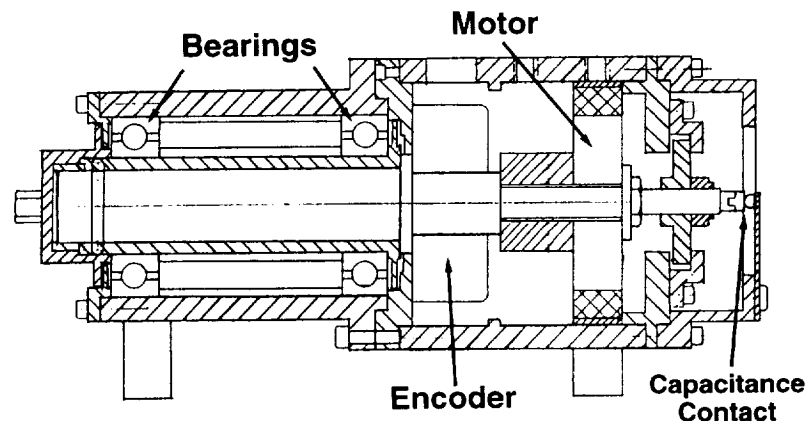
Bearing Assembly Test Fixture (1/2 scale)
